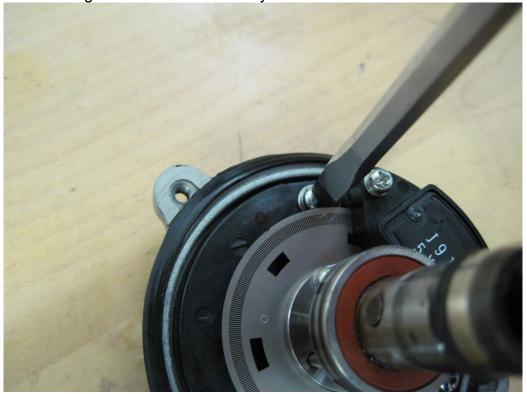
Remove 3 screws holding sensor using 1/4" flat screwdriver
